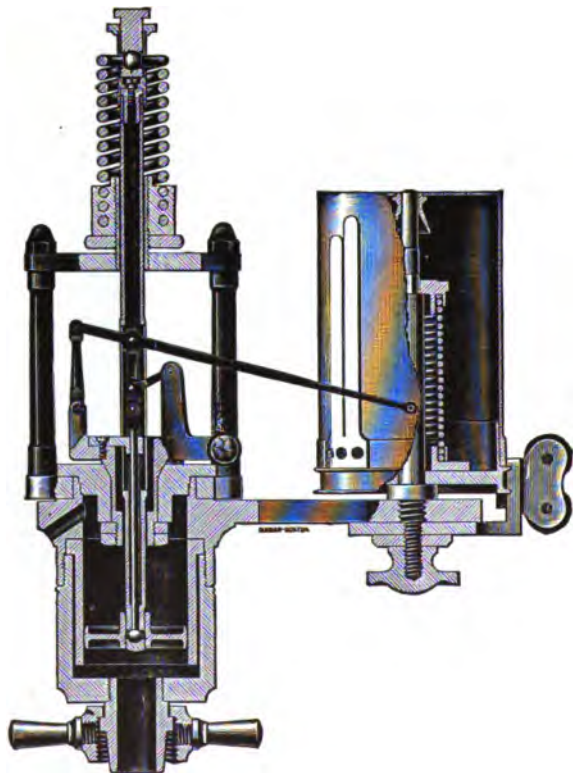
SEC. 3.—Sectional view of Crosby steam engine indicator.
